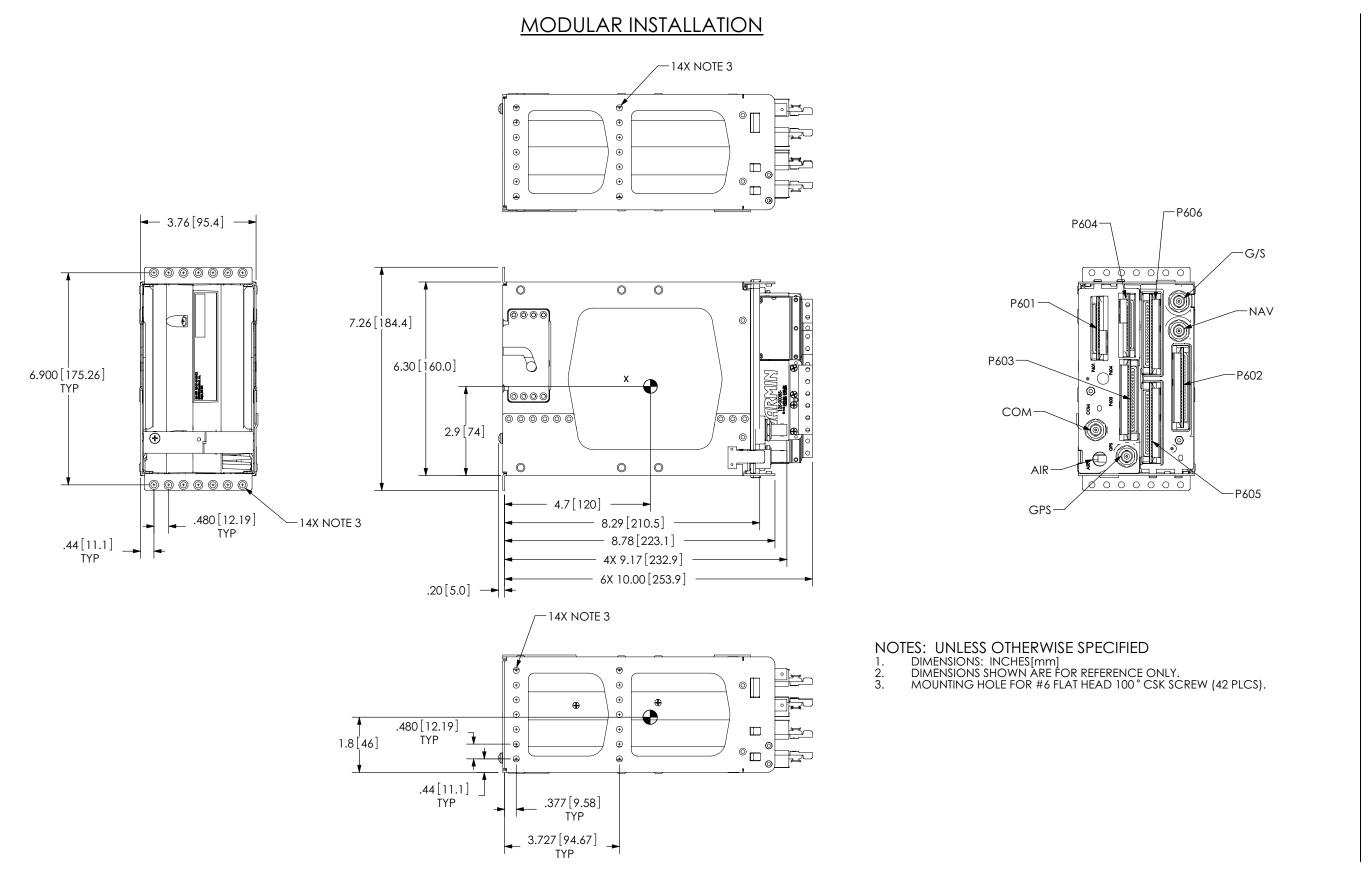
GIA 63(W) Modular Installation Outline Drawing
